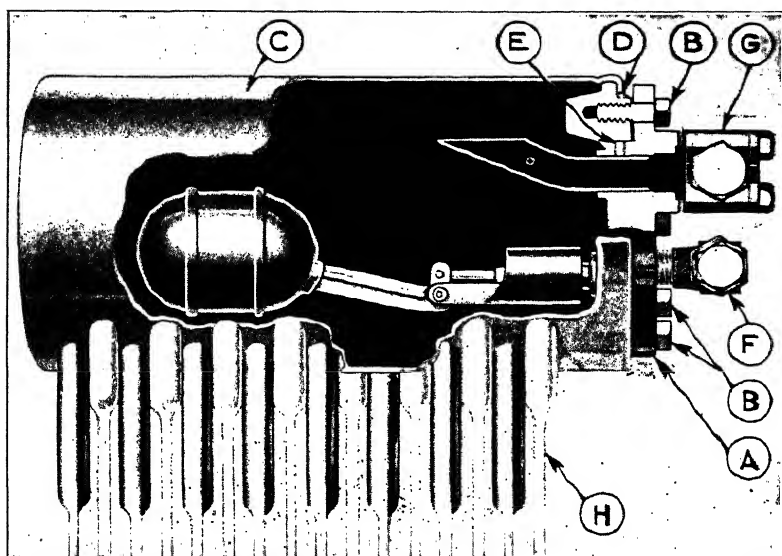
Details of Frigidaire cooling unit (evaporator).
